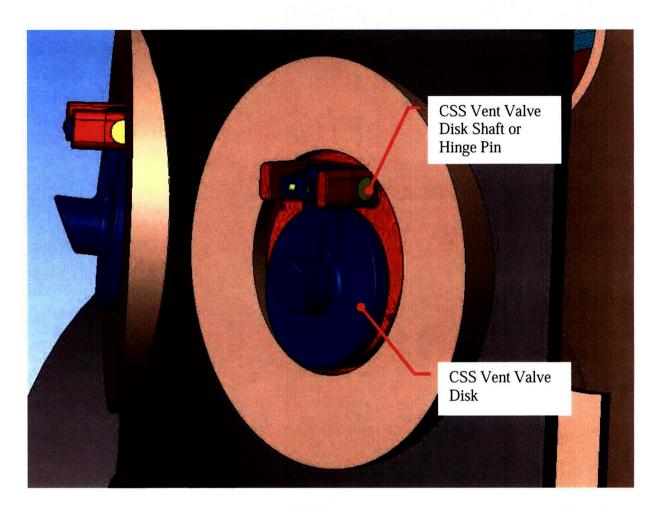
Typical core support shield (CSS) vent valve – outside view – for the B&W-designed PWRs
